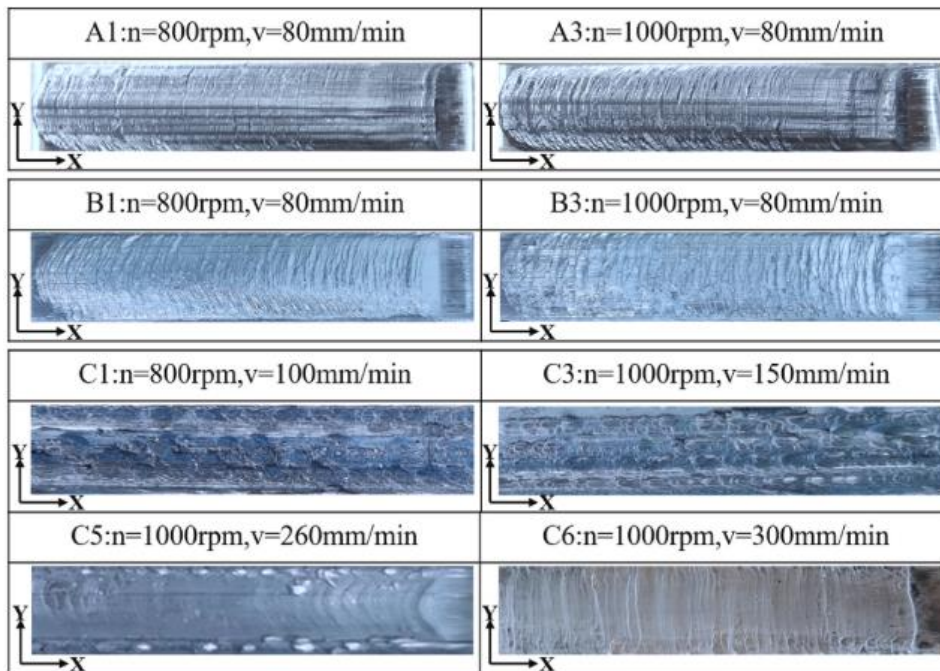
Surface morphology of samples with tool diameters of: a) 25mm; b) 50mm; c) 100mm [11].
